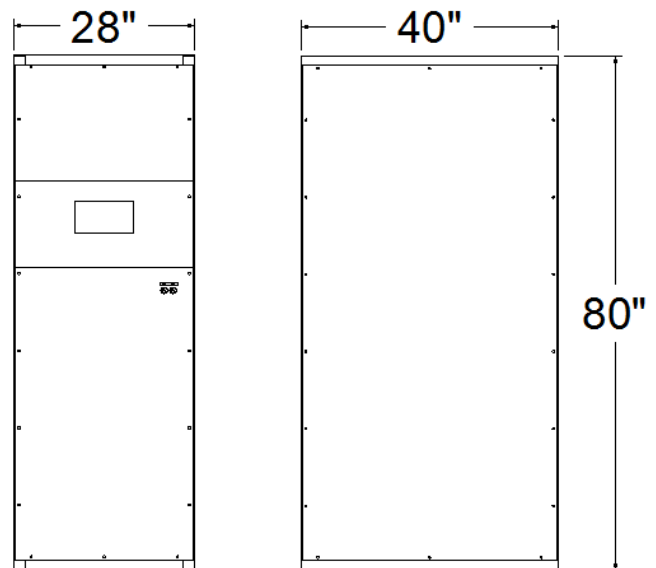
Ultra Compact Front Access Switchgear Single Section Dimensions (rear access is not required)
